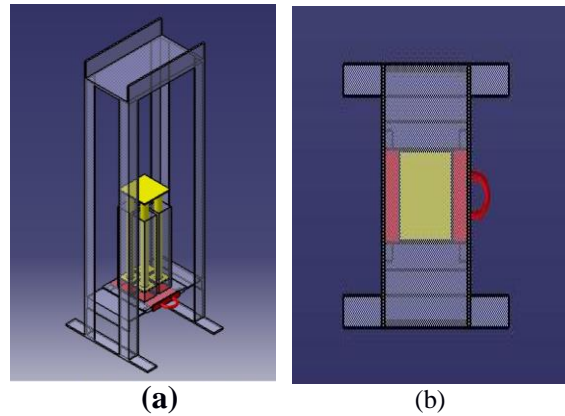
a. Assembly of Briquette Press Machine, b. Briquette extracting chamber
